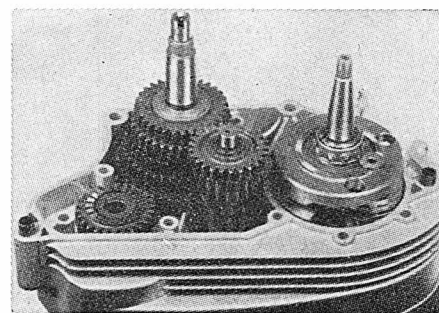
View of transmission gears positioned in the left crankcase half. Typical of most models.
